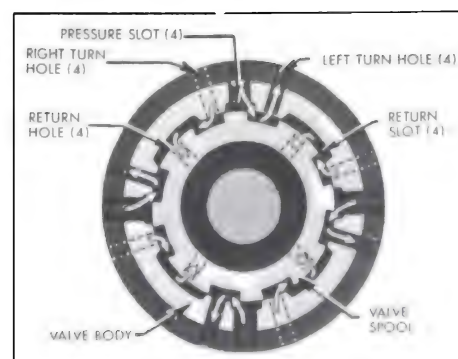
Upper End View of Rotary Valve - Left Turn
